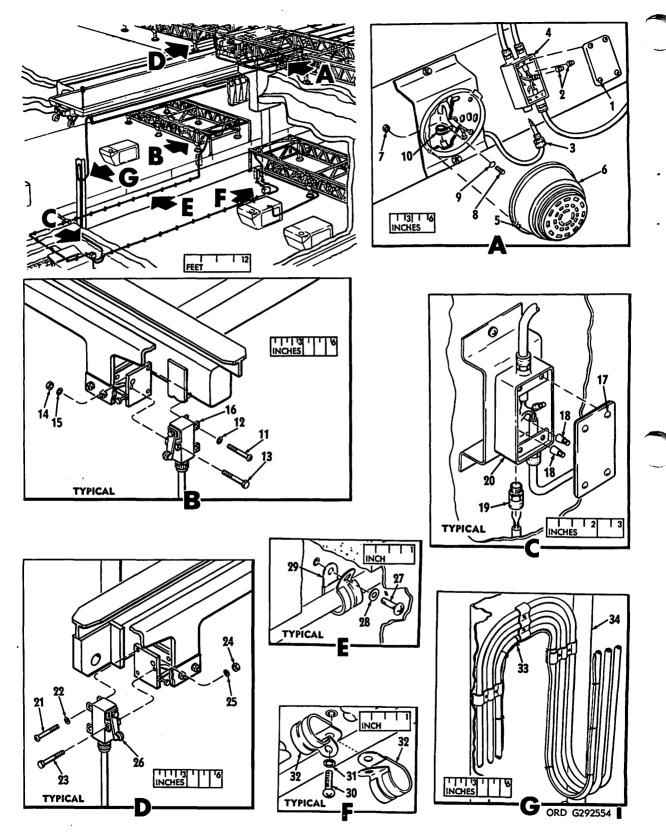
Removal and installation of the warning horn cables and cable assemblies.
